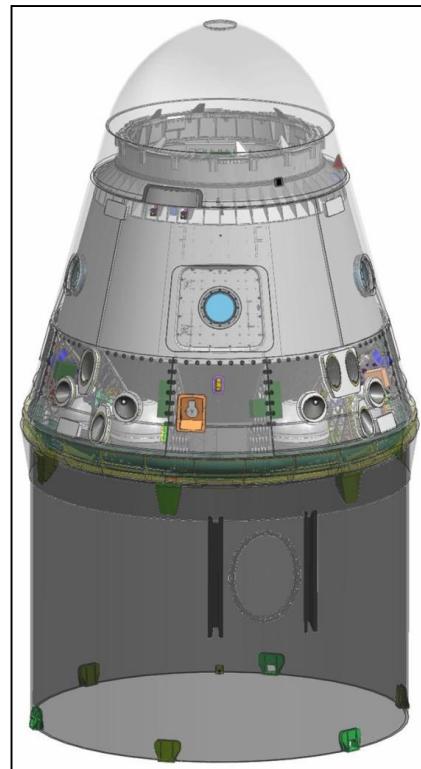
Drawing of the Falcon payload capsule, the Dragon, in launch configuration.
